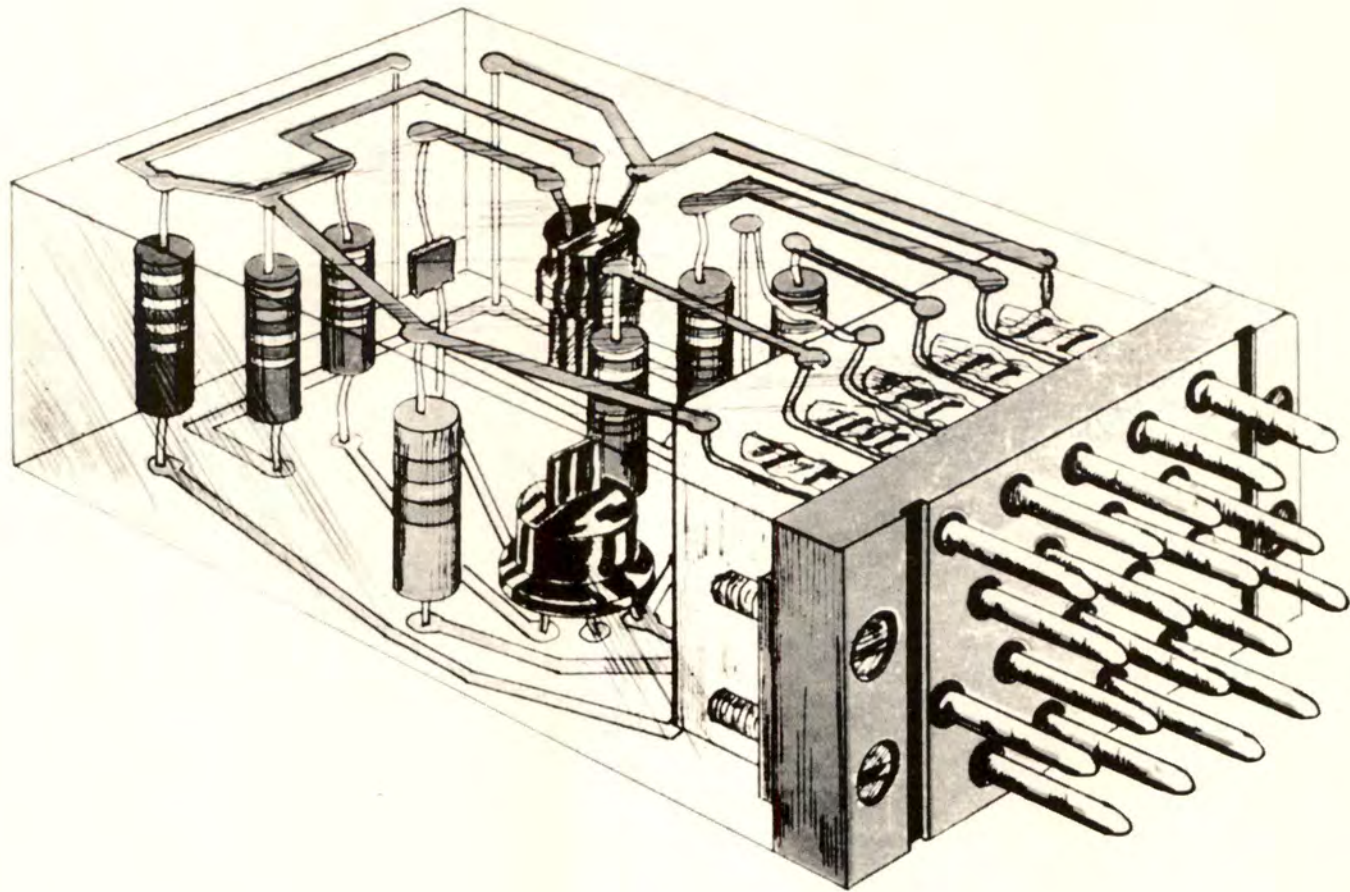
Drawing of proposed plug-in unit employing plated connections.
